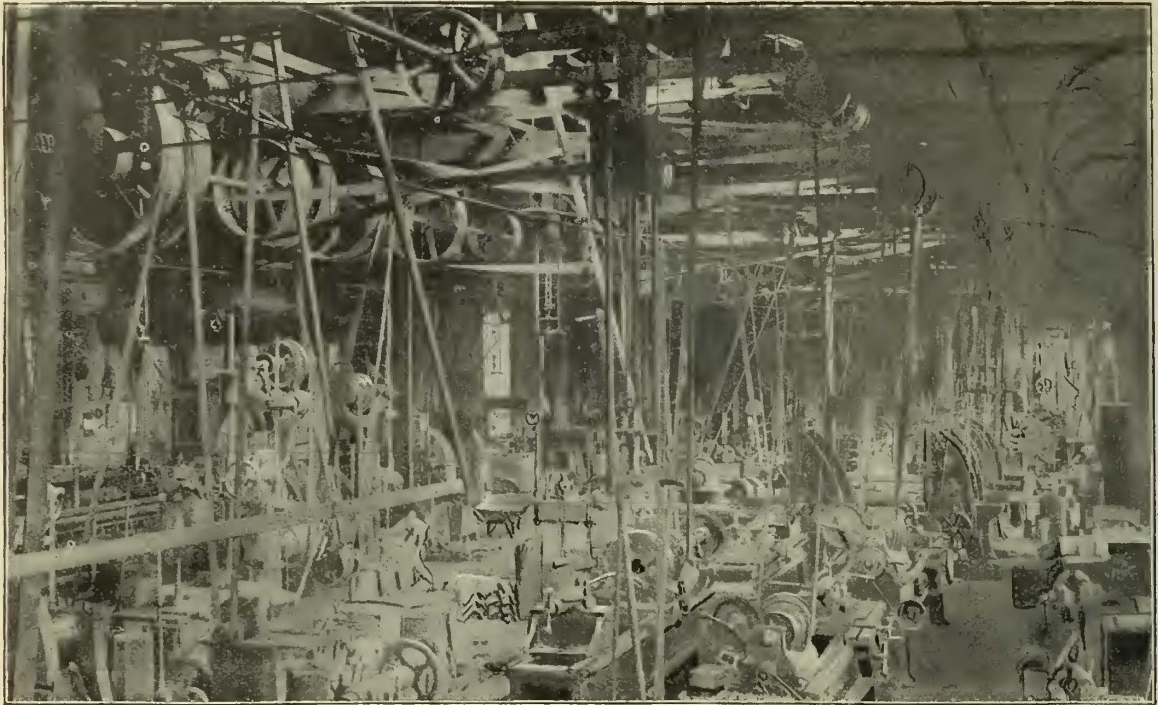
MACHINE SHOP—FALLS RIVET & MACHINE CO.'S WORKS.
